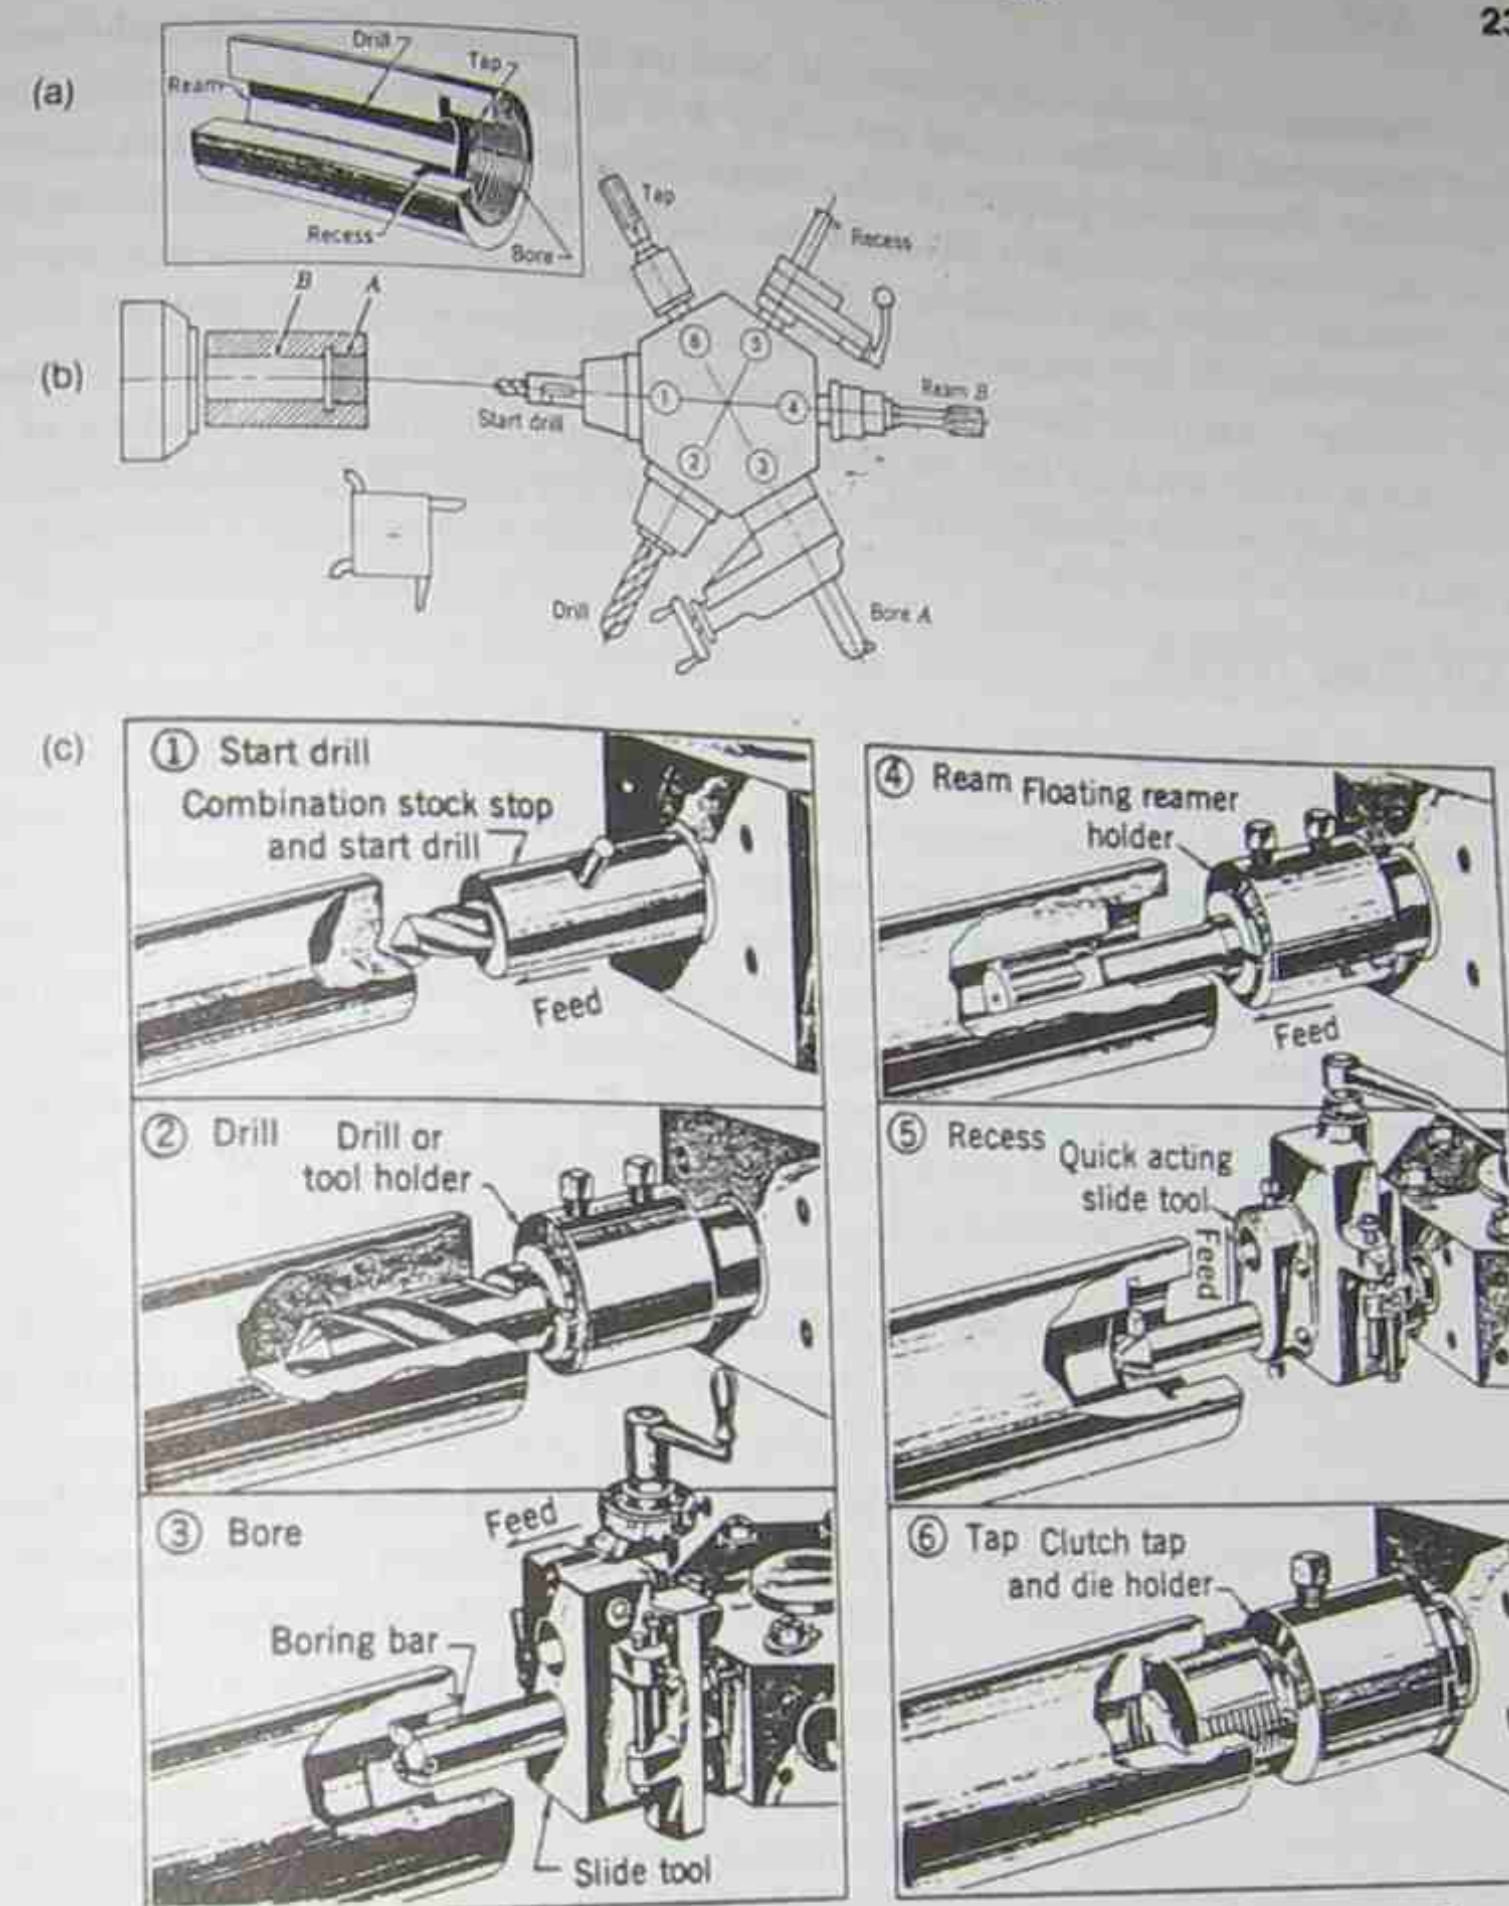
(a) Part to be produced on a turret lathe, (b) setup illustrating sequence of operations related to turret tools, and (c) details related to internal cutting operations.
